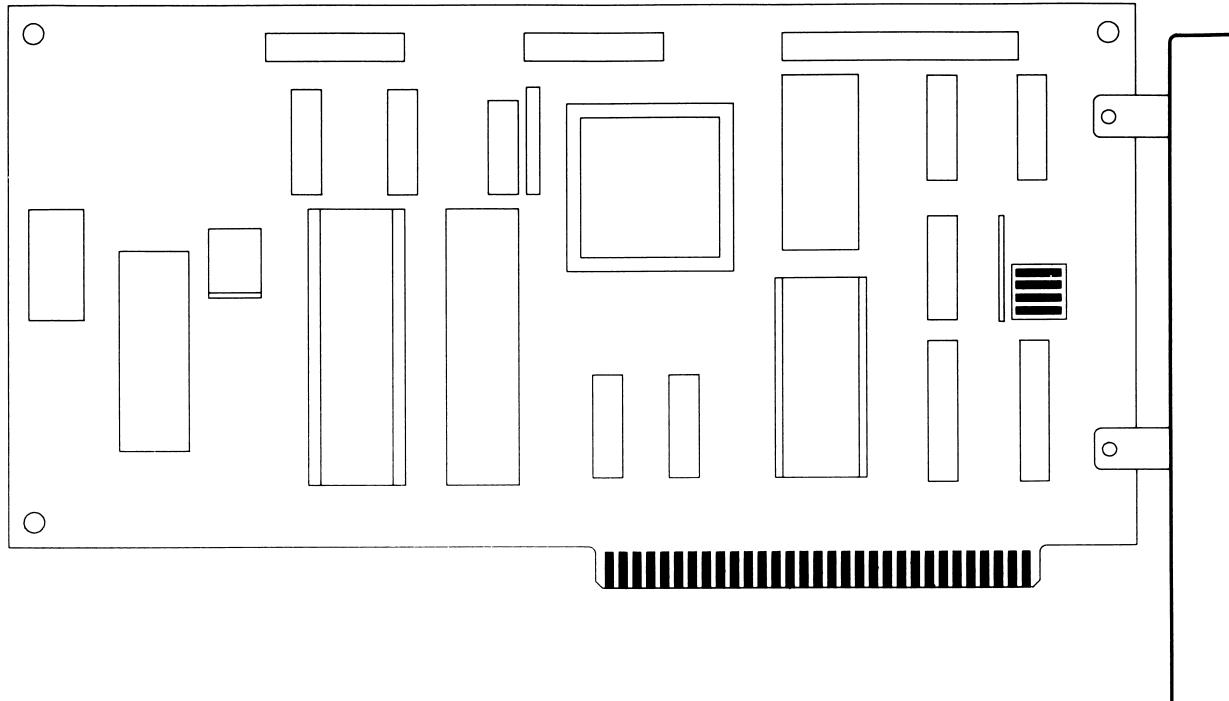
Half-Length Fixed Disk Drive Controller Board (WD1002SWX2).
